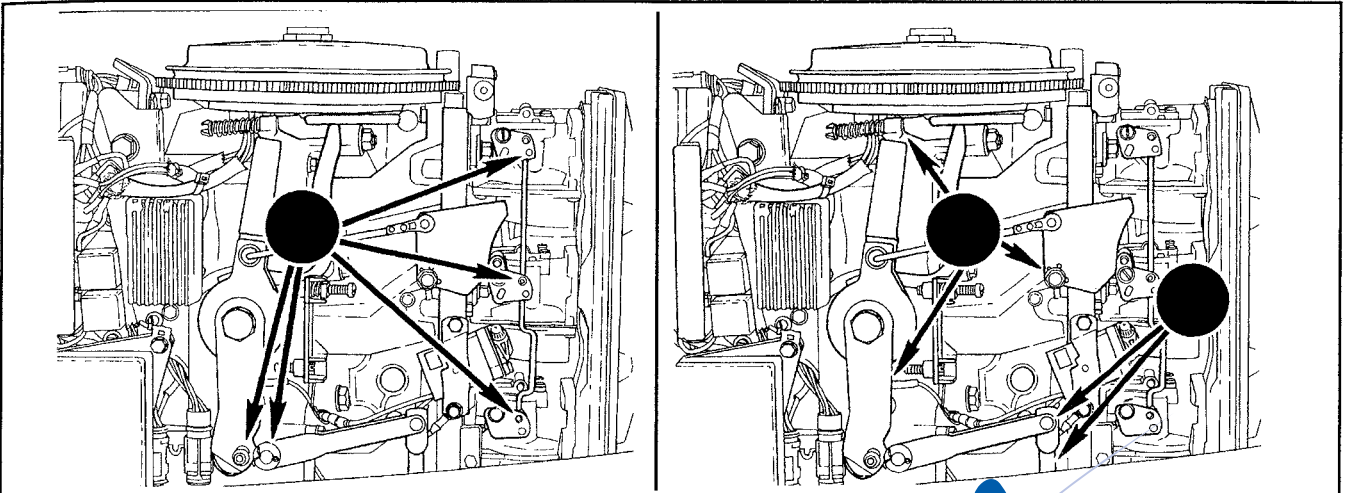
Carburetor linkage, cam roller, shift shaft and control shaft/lever bushing lubrication points for 25-50 hp (913cc) 3-cylinder, 2-stroke motors (except the 65RS, 65WR and some 50-70TTL models)
